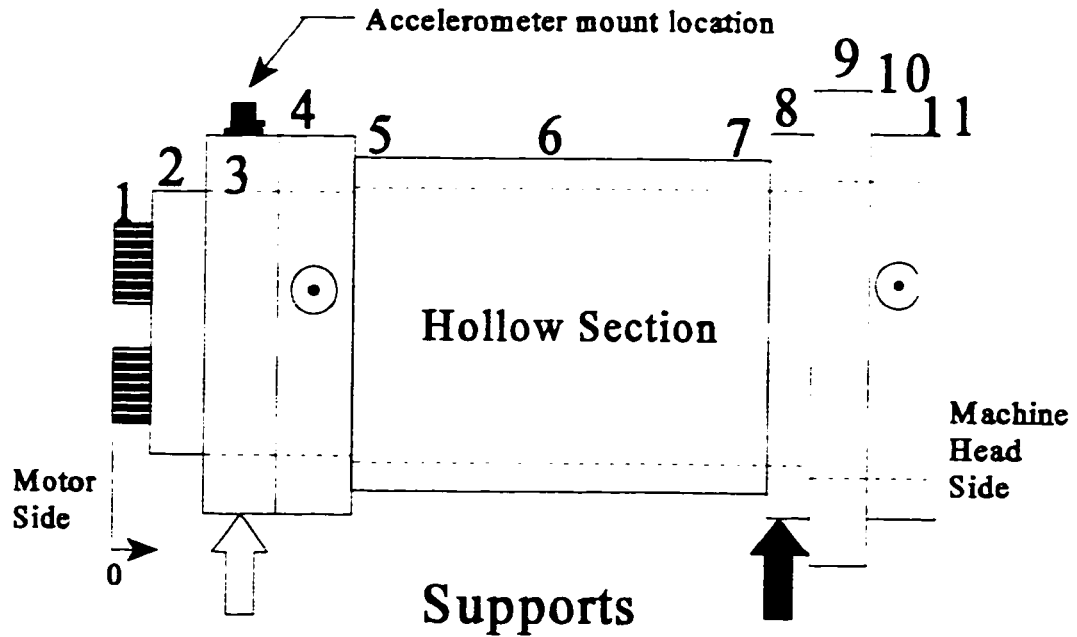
Machine Spindle Housing F.R.F. Layout
